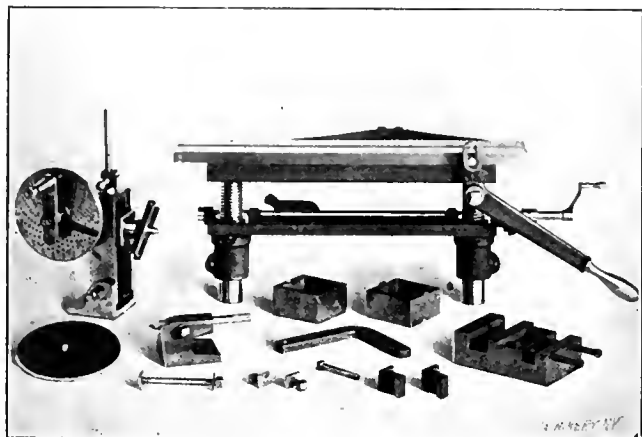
Lathe Milling Attachment built by the Young Machine & Tool Co.
